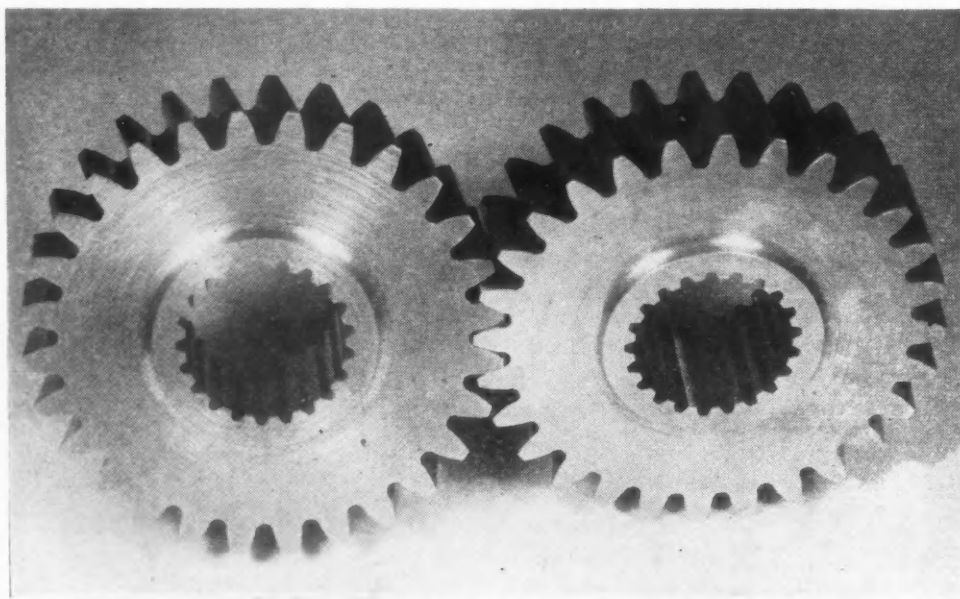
Test gears are installed in the testing machine to rotate in different planes which include an angle of 15 deg.
